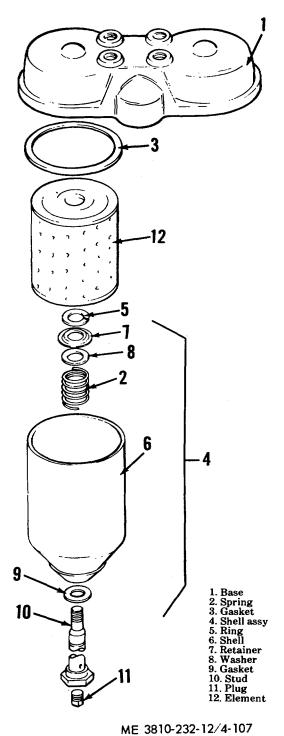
Trans mission and torque converter oil filter, disassembly and reassembly.
